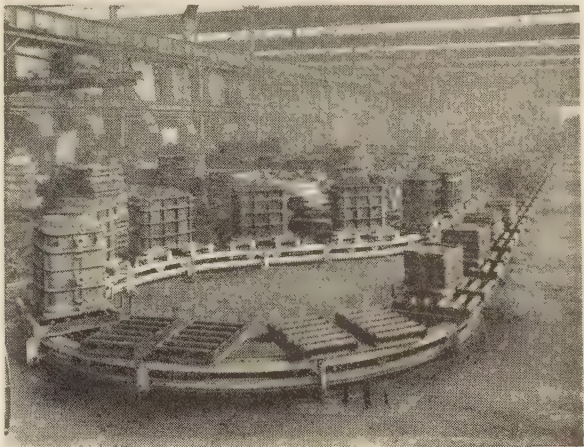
CONTINUOUS-TYPE MOLD CONVEYER USING ROLLER CONVEYER TOPS
